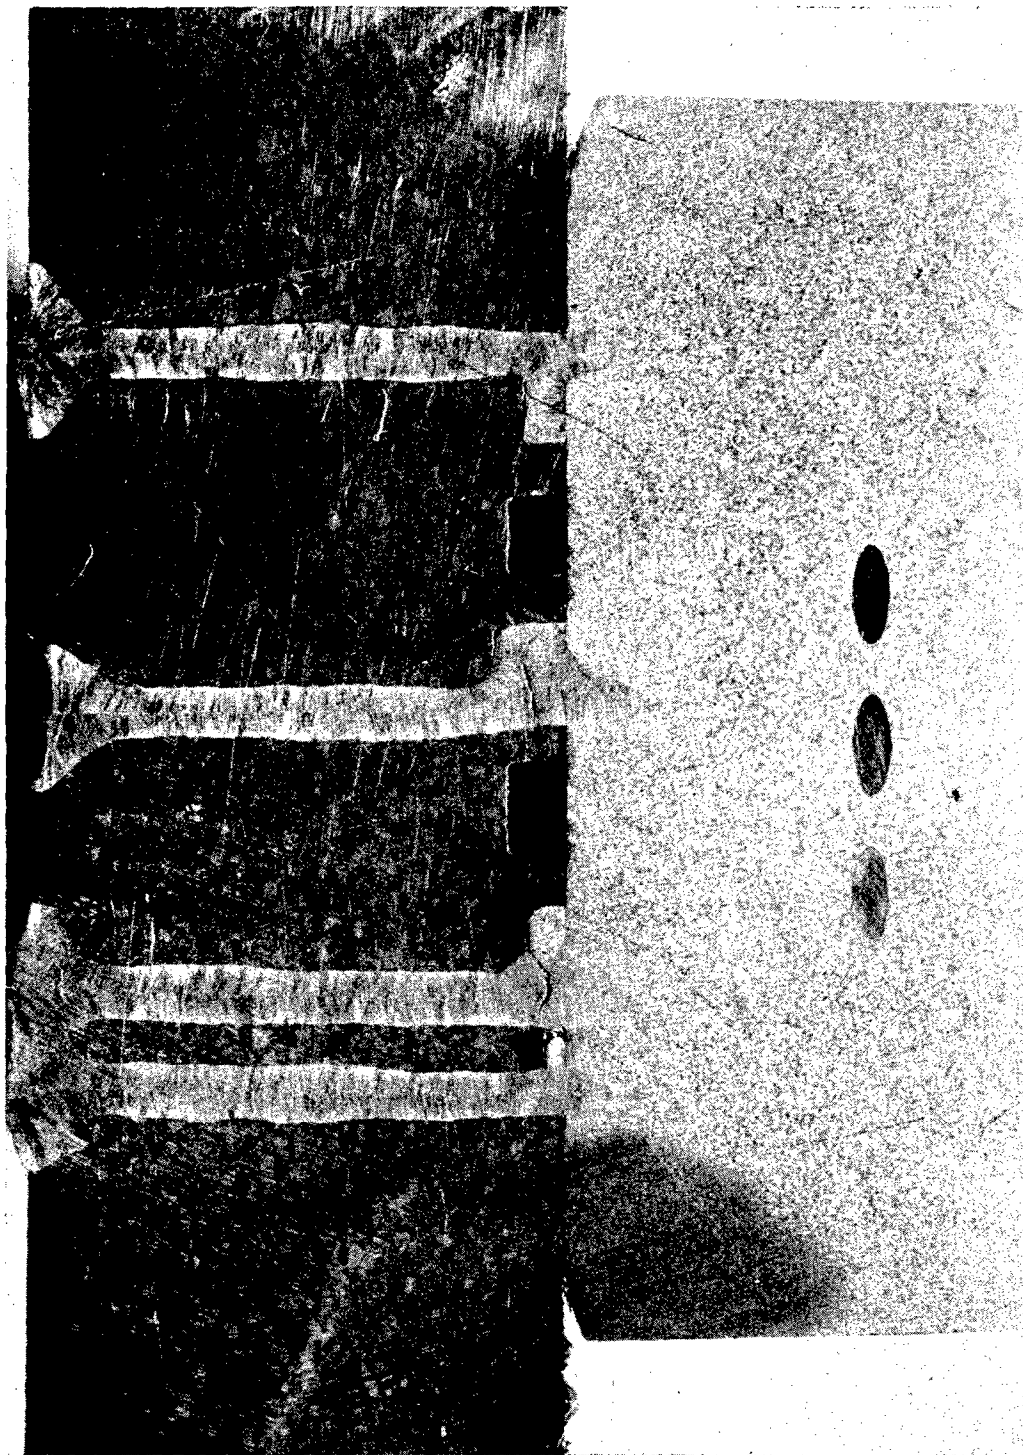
Welding Between Grooves, Sciaky Welder.
